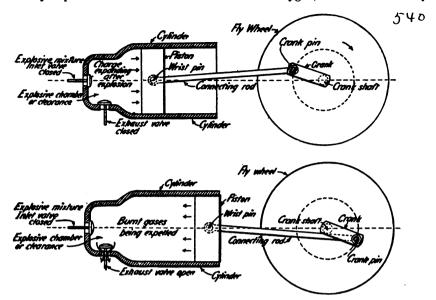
8HOWS THE PISTON BEING FORCED OUT AFTER THE EXPLOSION FIG. 4—8HOWS THE PISTON RETURNING TO EXPEL THE BURNT GASES
